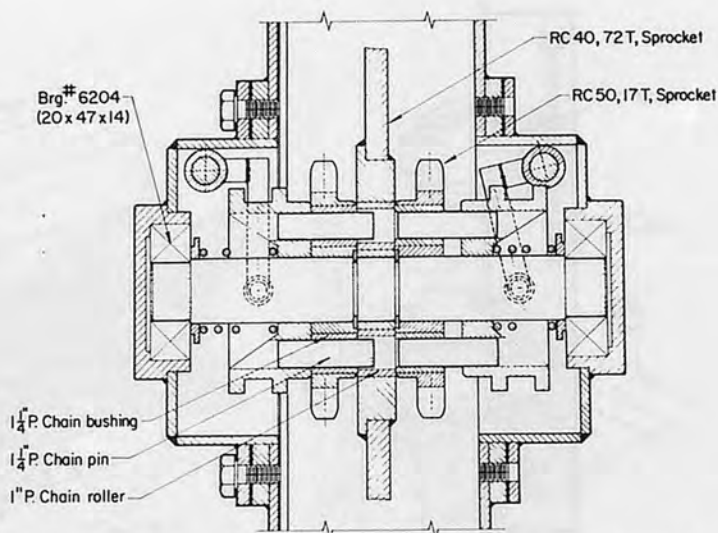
Cross-sectional view of IRRI 6-8 hp Power Tiller with pin steering clutches.
